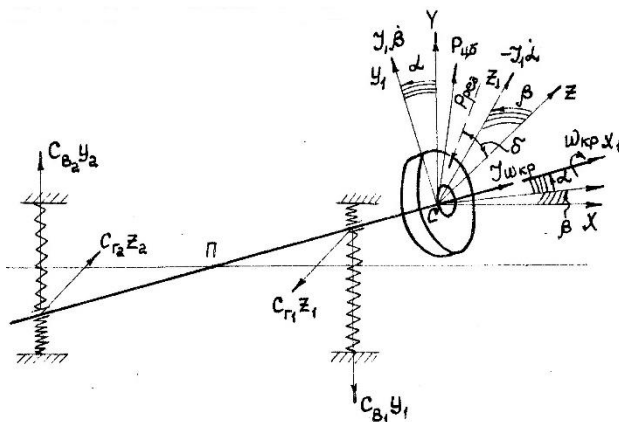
Scheme of the acting forces of an unbalanced cantilever spindle with a grinding wheel
